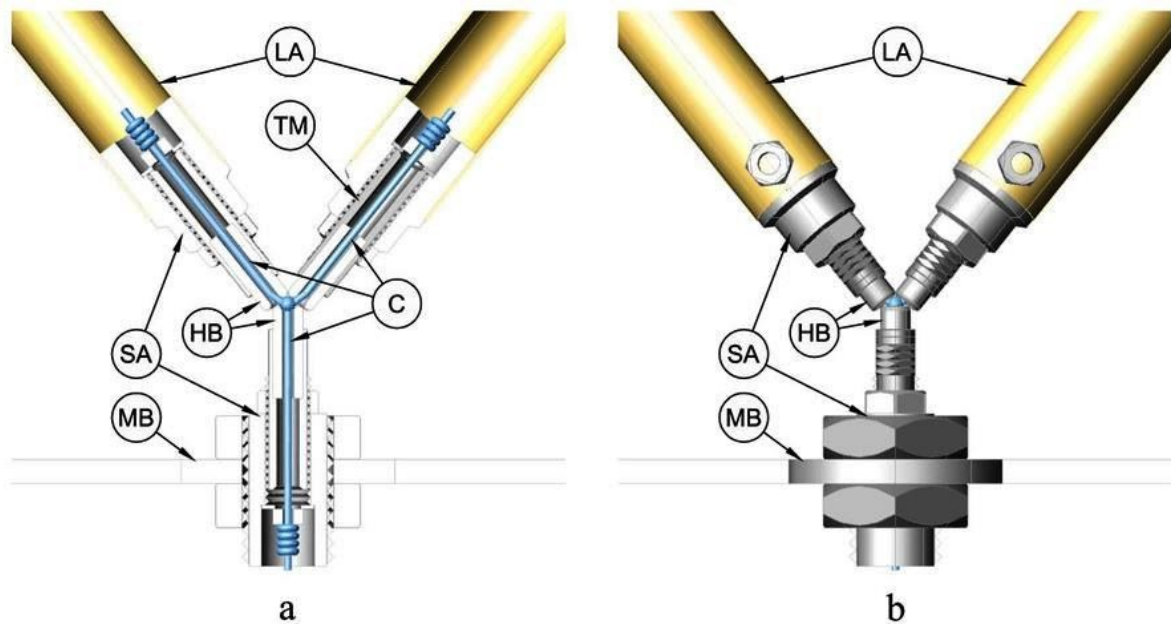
Connector joint assemblies, shown in (a) section and (b) side view. (SA) sub-assemblies, (LA) linear actuators, (MB) mobile base, (C) elastic cord, (TM) threaded mechanism, and (HB) hollow barrel.
